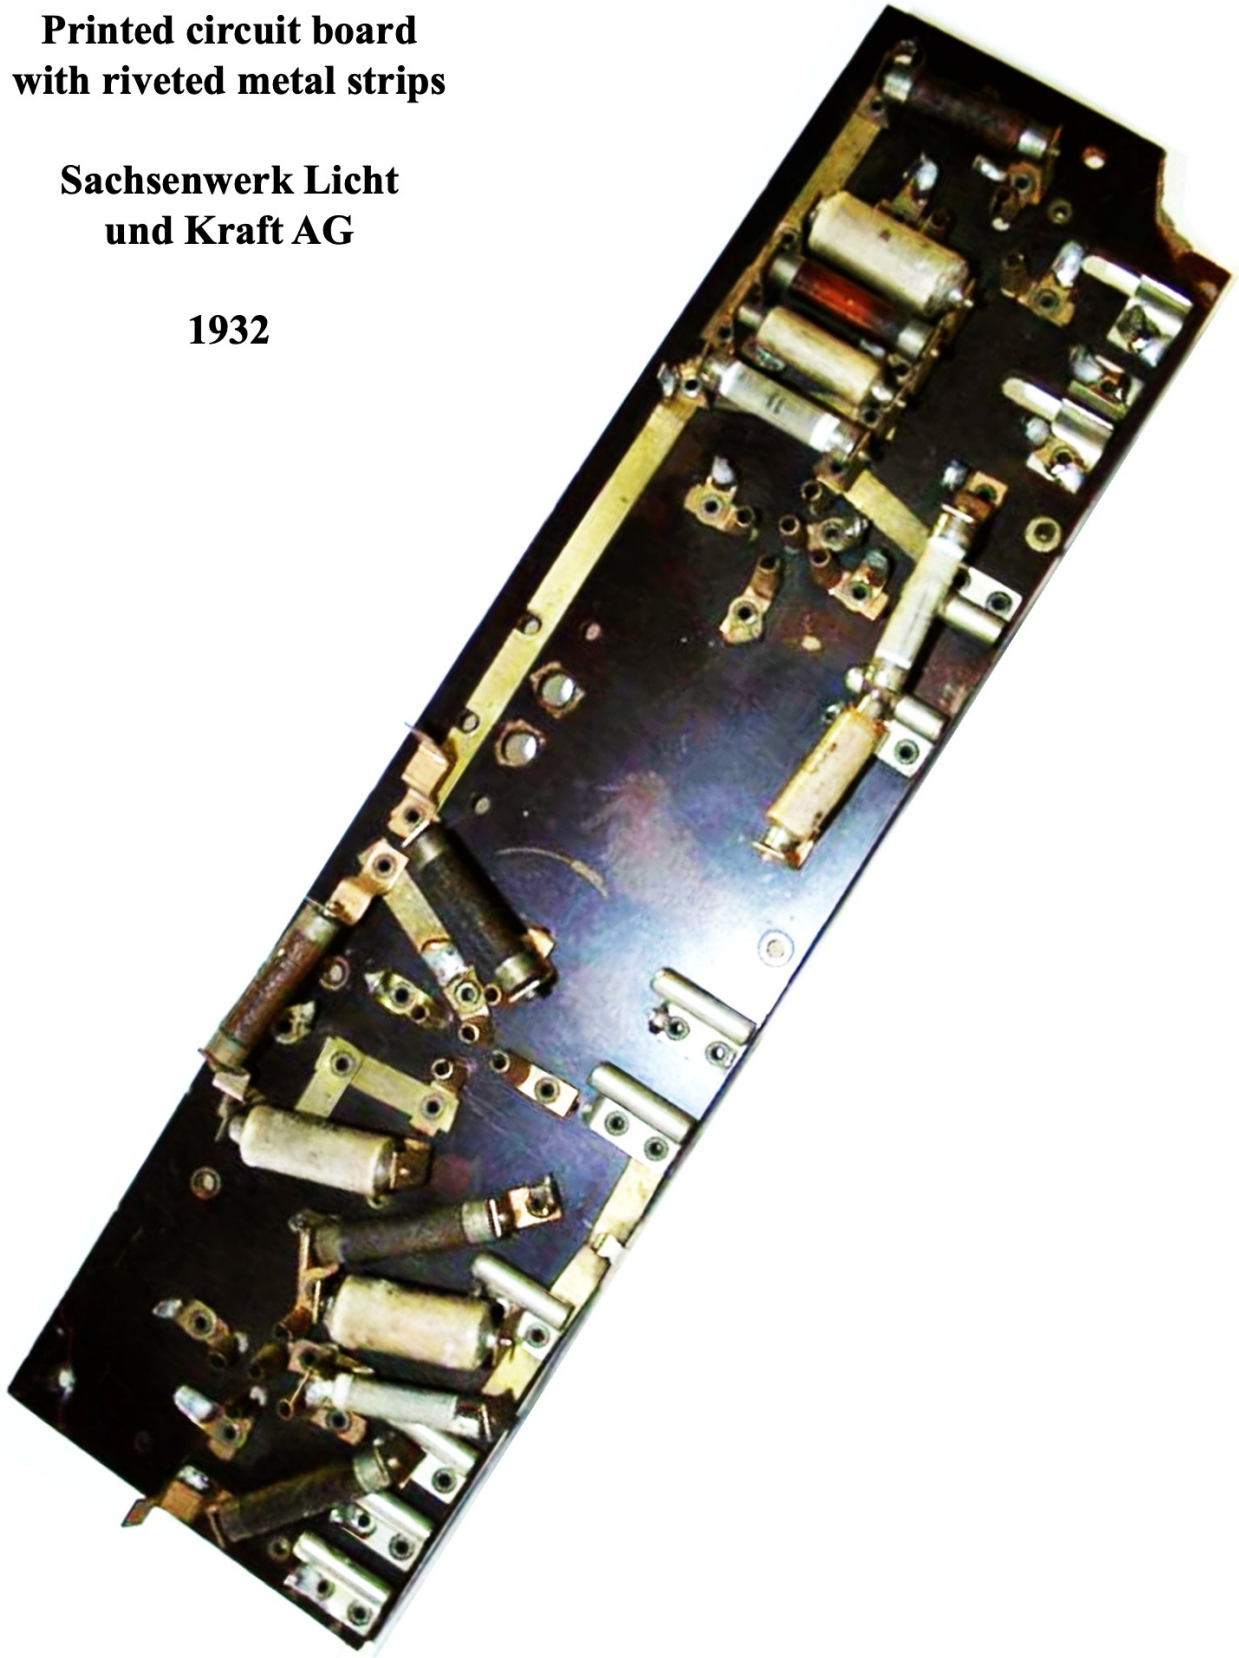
Printed circuit board with riveted metal strips, Sachsenwerk Licht und Kraft AG, 1932.
